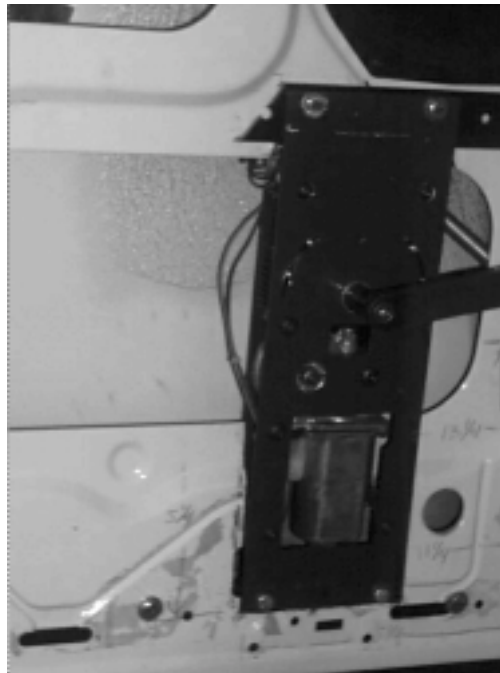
DOOR OPENER MOUNTED IN REAR LEFT DOOR
